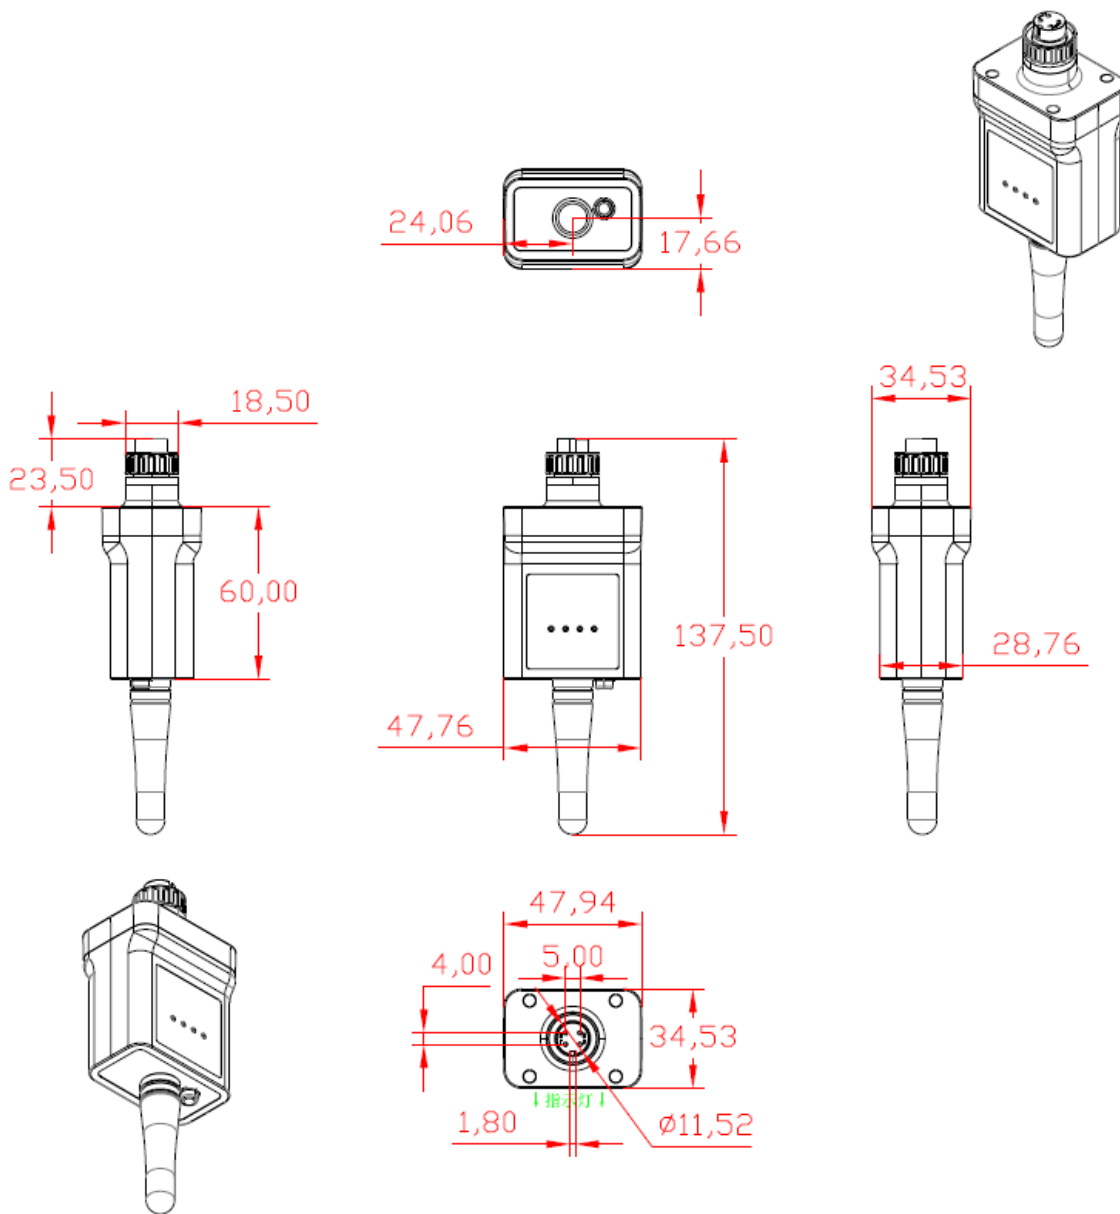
Solar Plug-SWB1-09/-10/-12/-26 Mechanical Dimensions
